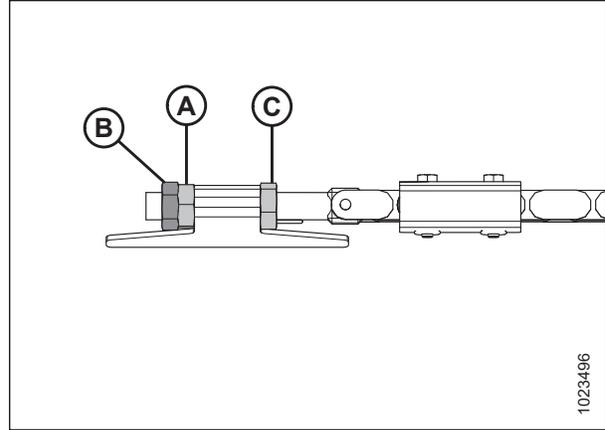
Chain Adjustment Bolt – Left Shown, Right Similar
